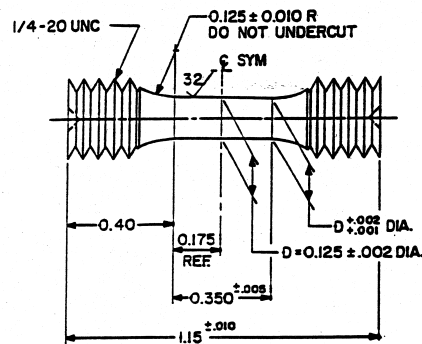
Threaded tensile specimen fabricated from 6.35-mm diameter bar or 6.35-mm thick sheet stock
